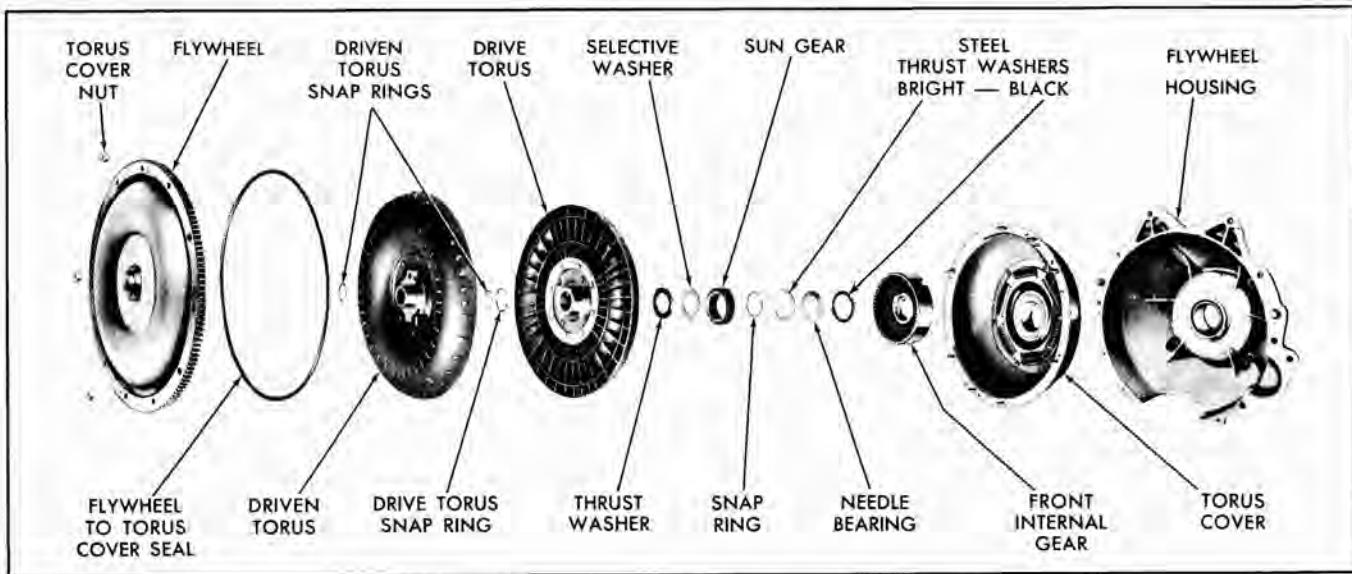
Flywheel Housing and Torus Parts—Exploded
